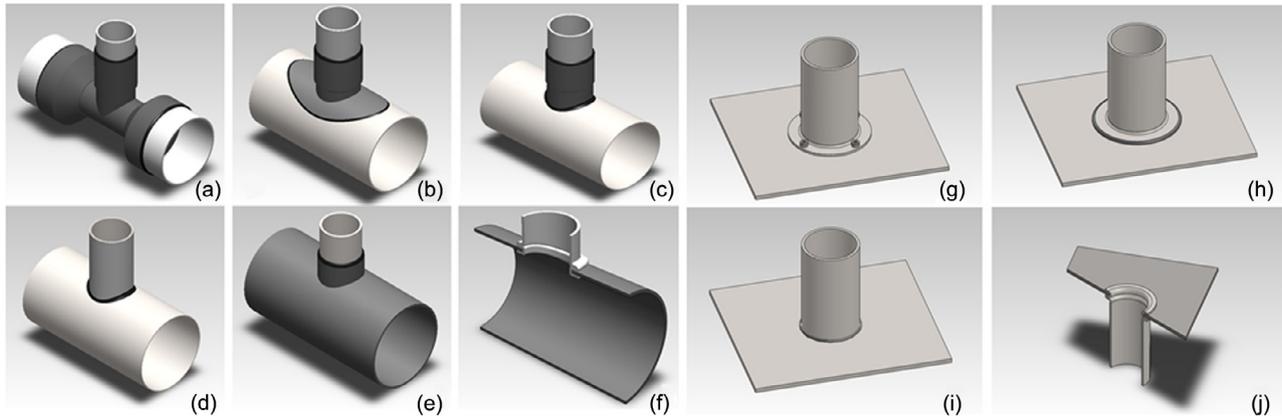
Conventional and new proposed technologies for connecting tubes and fixing tubes to sheets.
